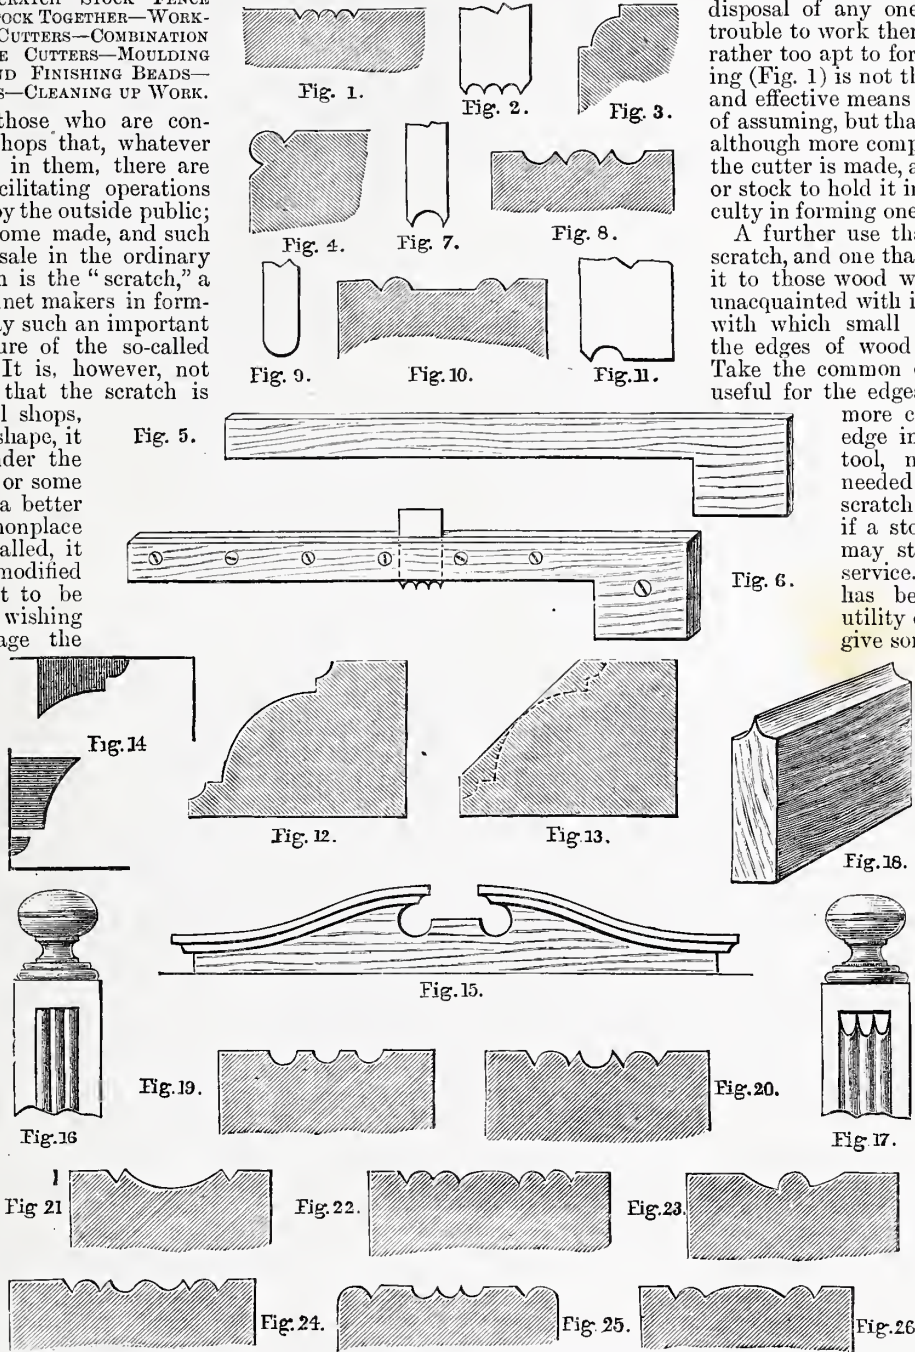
Beads. Fig. 2.—Cutter. Figs. 3, 4.—Moulding on Edges. Fig. 5.—Shape of Stock of Router. Fig. 6.—Scratch or Bead Router Complete. Fig. 7.—Cutter for Bead. Fig. 8.—Bead between Hollows. Fig. 9.—End of Cutter for Hollows. Fig. 10.—Beading with Sunk Flat between. Fig. 11.—Cutter for Fig. 10. Fig. 12.—Moulding. Fig. 13.—Wood prepared for Moulding. Fig. 14.—Position of Cutters for Moulding. Fig. 15.—Curved Moulding on Pediment. Fig. 16.—End of Upright with Knob. Fig. 17.—Alternative Finishing for Beads. Fig. 18.—Piece of Wood for Rubbing between Beads. Figs. 19-26.—Sections for Scratchings.
